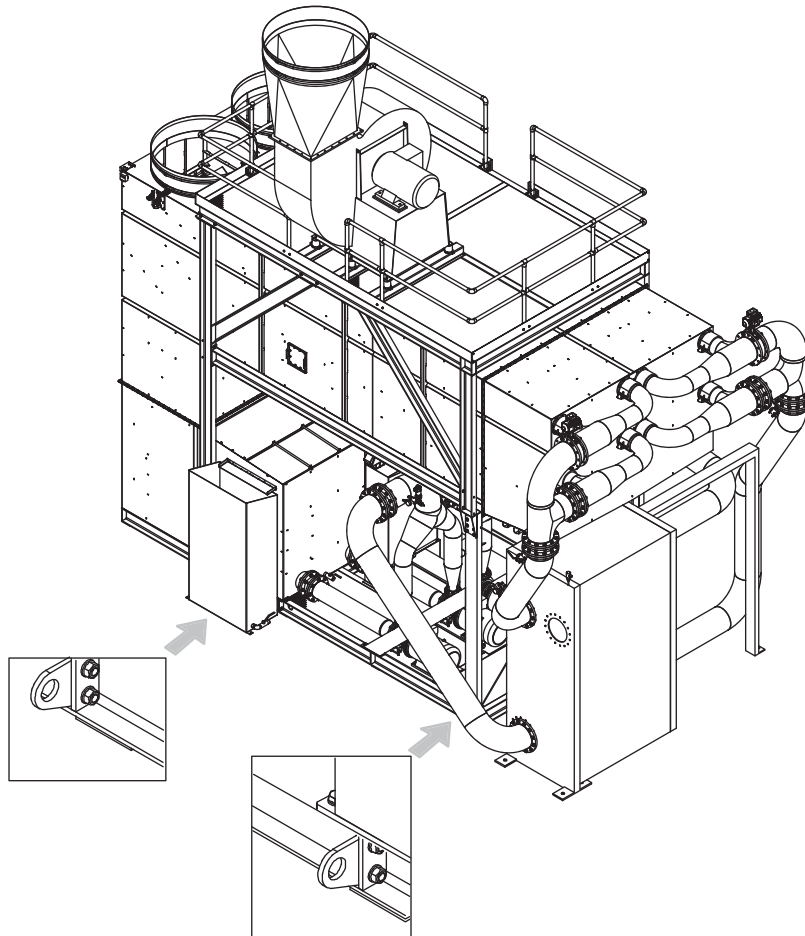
Transport points at the condenser. Example of crane eyes.
